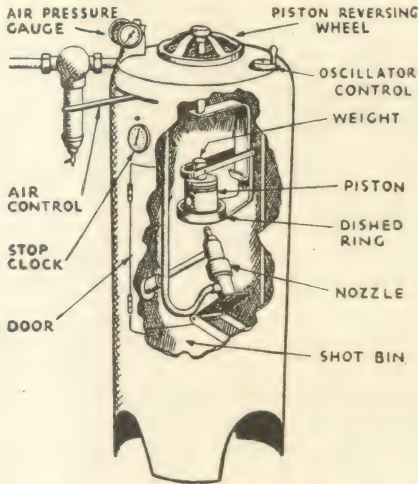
THE KOETHERIZER METHOD OF PISTON EXPANDING
